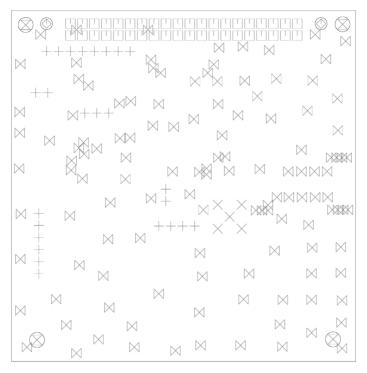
Infineon Evaluation Board V1.1 drill map and tool list
